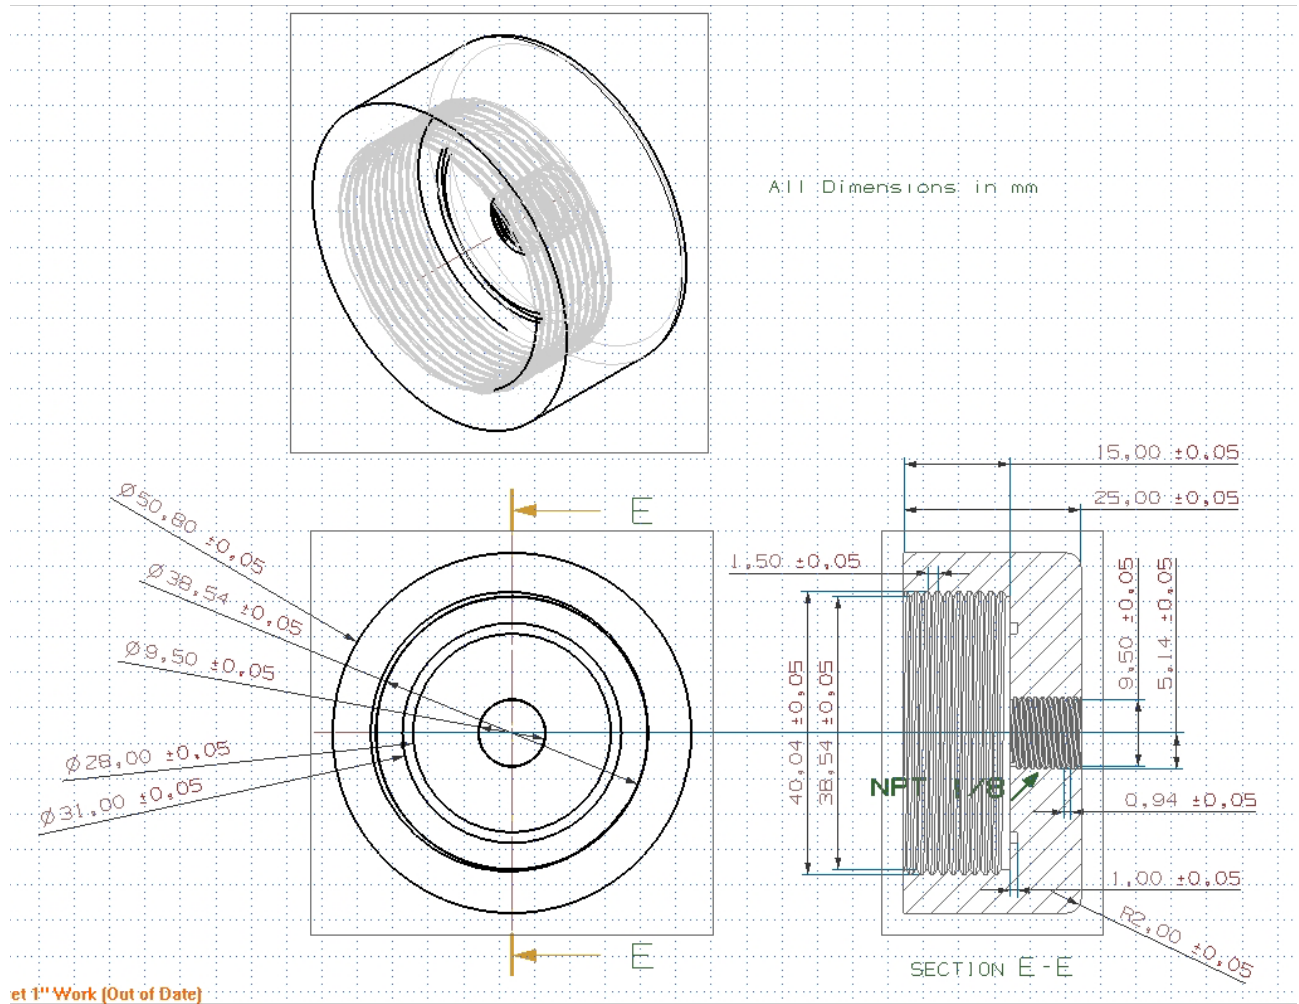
Engineering Drawing of the Cap of the Steel Casing
